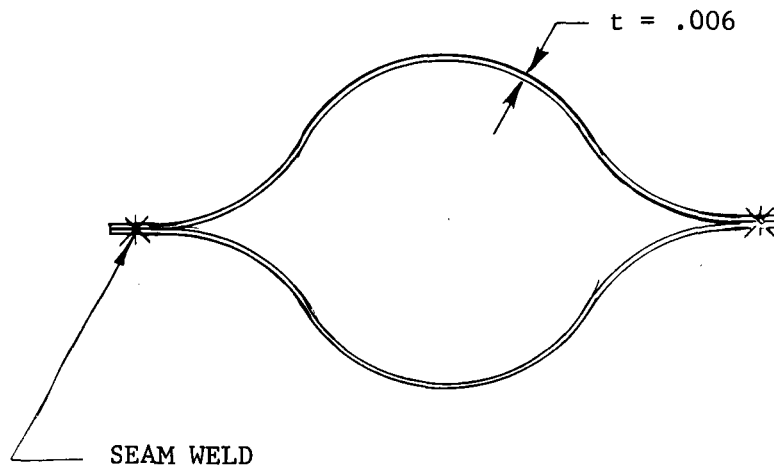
RYAN FURLABLE BOOM CROSS-SECTION
